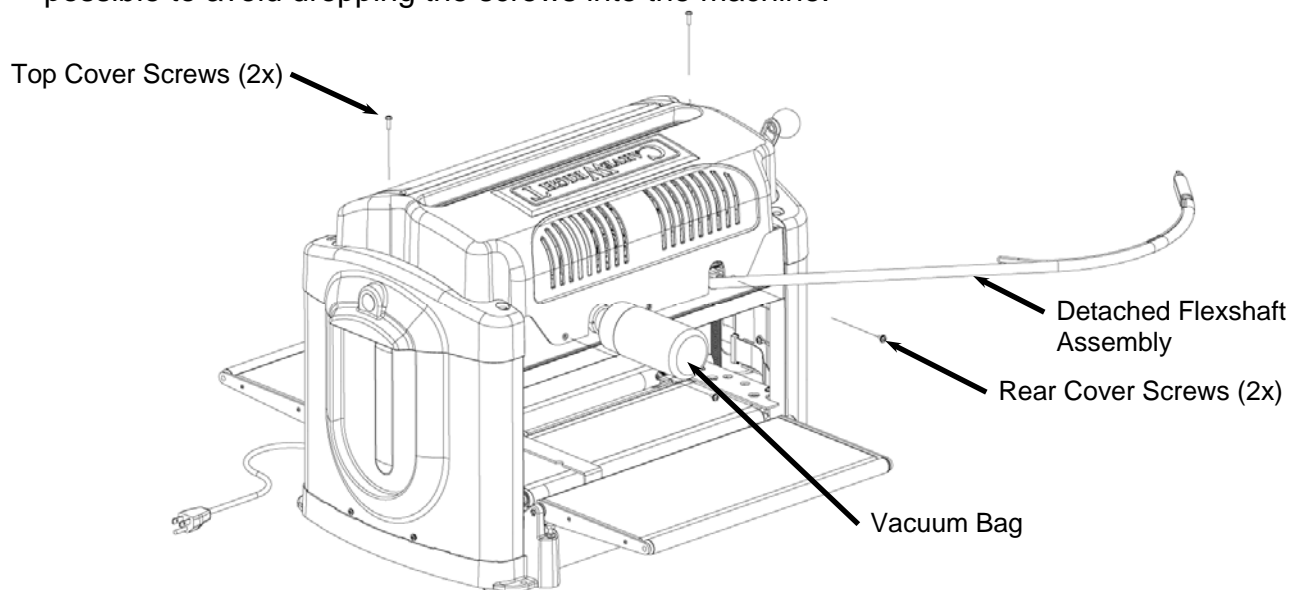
EXPLODED VIEW OF THE COVER SCREWS
